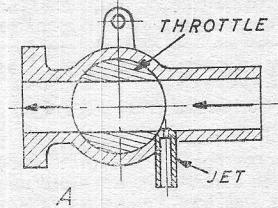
Air flow conditions in simple carburettor fitted with throttle valve
